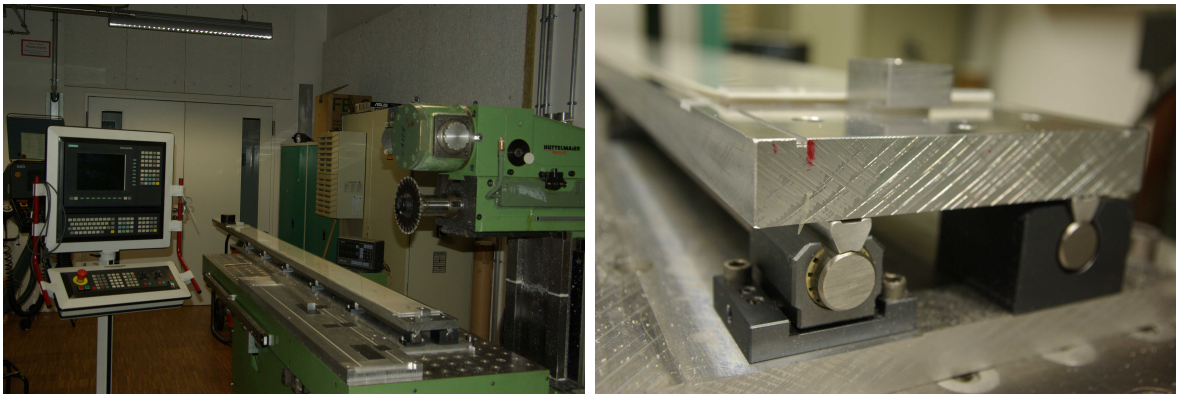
Left: Milling machine with jig used for cutting fibre mats along the fibres. The right picture shows a detail of the rail system needed to extend the range of the machine to 2.5m.
